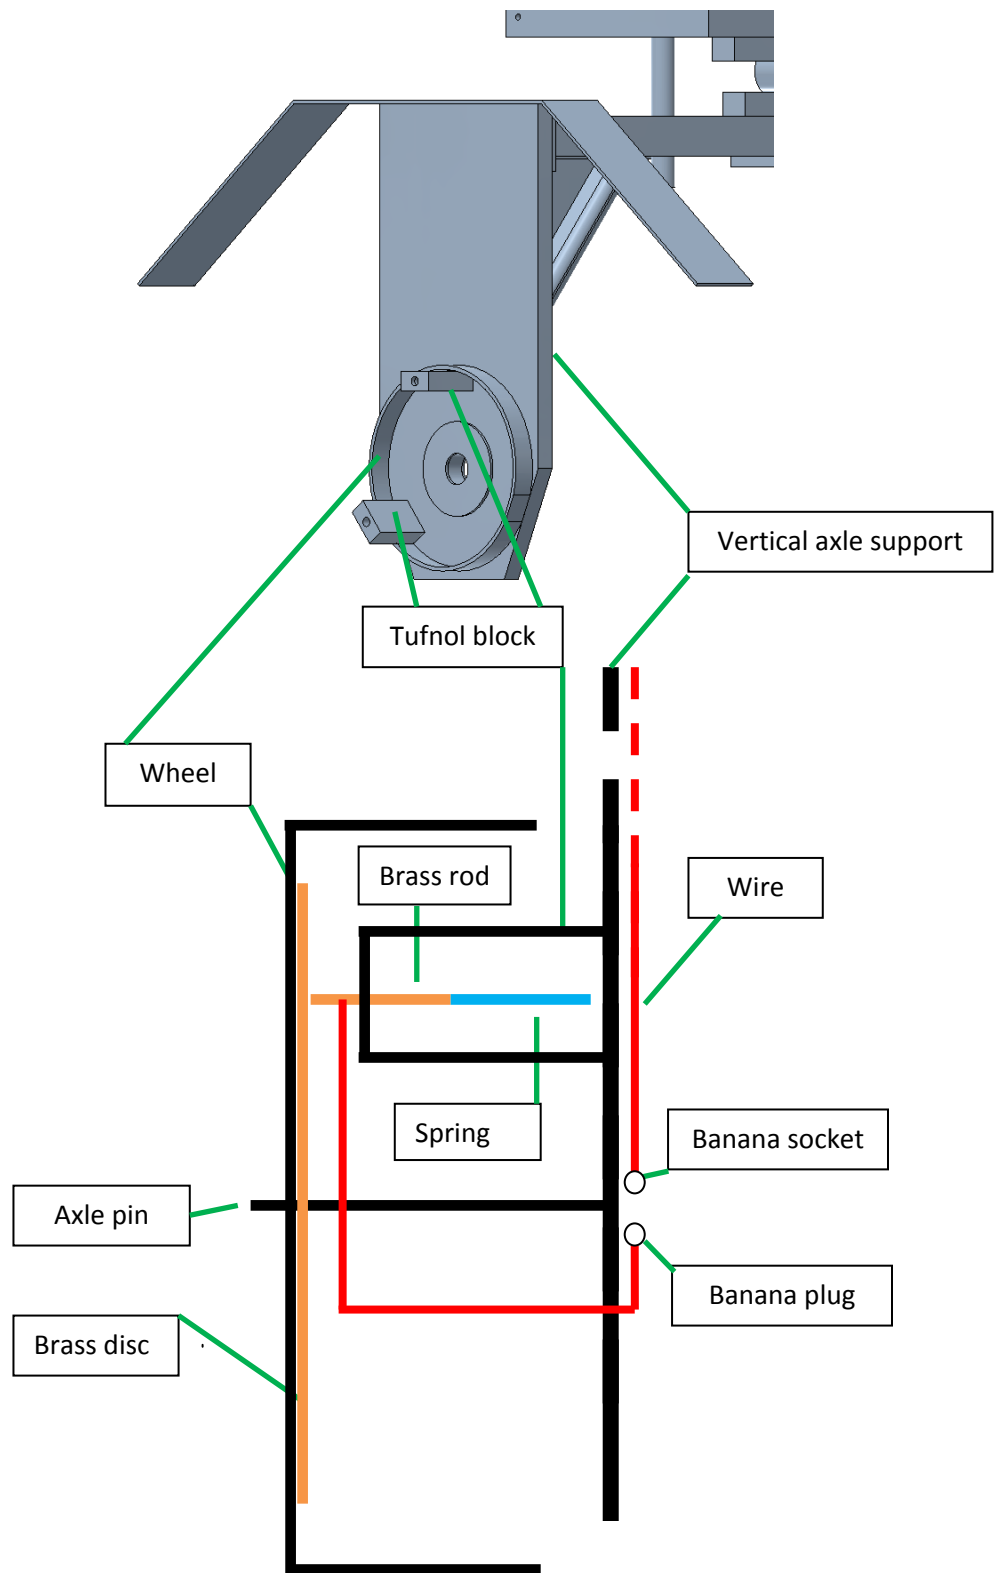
A cut away section of the vertical axle support and tuffnol block positions (top image) drawn in Autodesk 2012 with a cross-section diagram of the wheel hub and axle (bottom image not drawn to scale).
